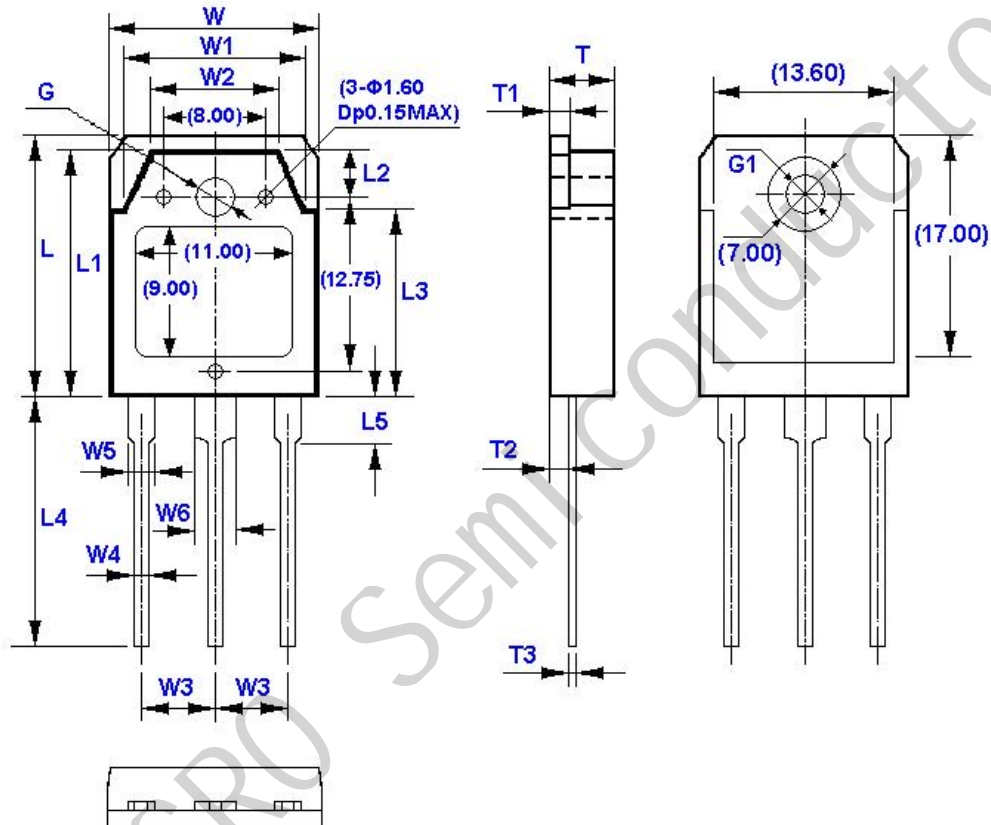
outline dimensions (unindicated tolerance:±0.1mm)
